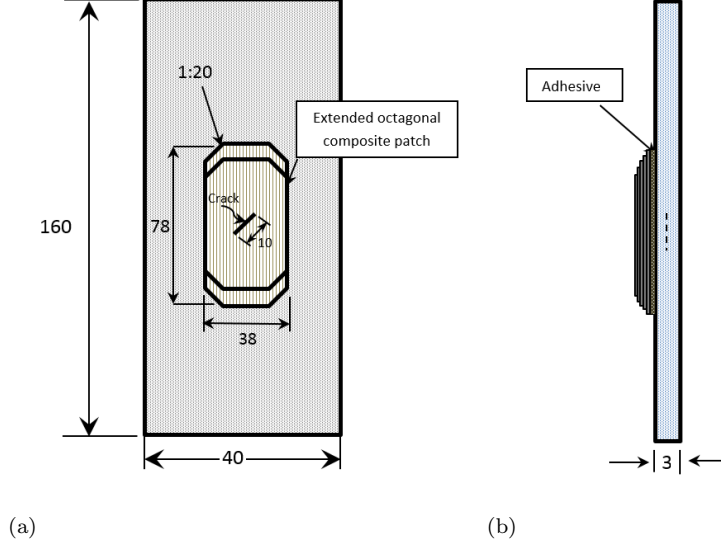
Single sided CFRP patch repaired panel (a) Front view showing the adhesively bonded patch over the cracked surface (b) Side view (All dimensions in mm)
